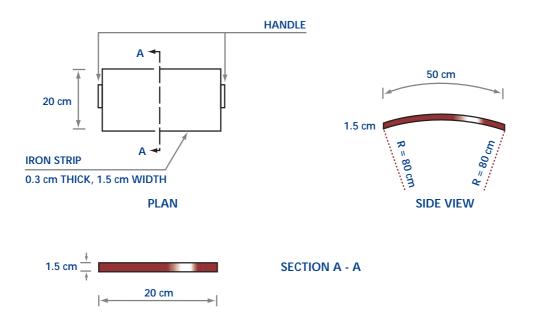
Measurements of iron segment mould. Iron strips of 1.5 centimetres wide and 0.4 centimetre thick is used for making the segment mould. The segment mould has a curved shape that is 20 centimetres wide and 50 centimetres long. Details of dimensions are shown in the drawing.
